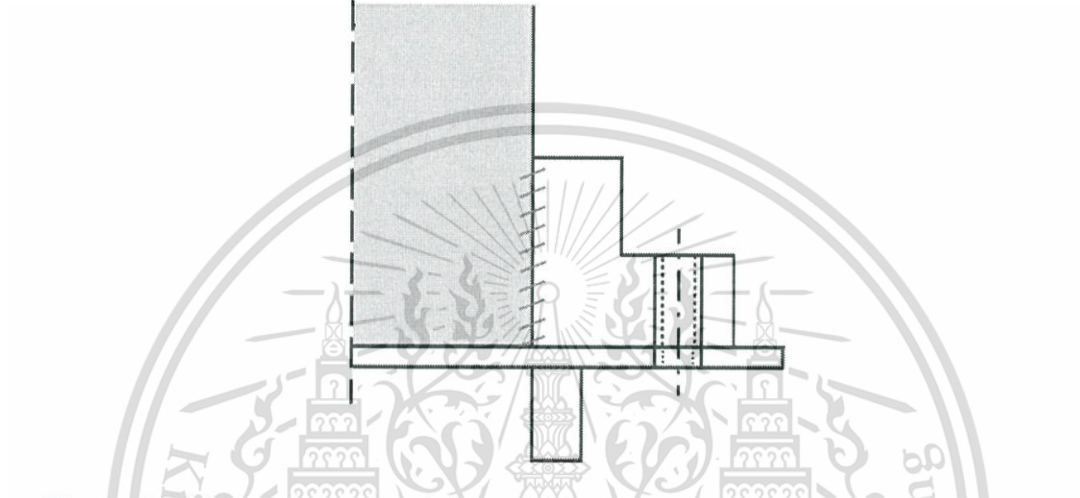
The mounting brackets geometry and dimension (mm.)
